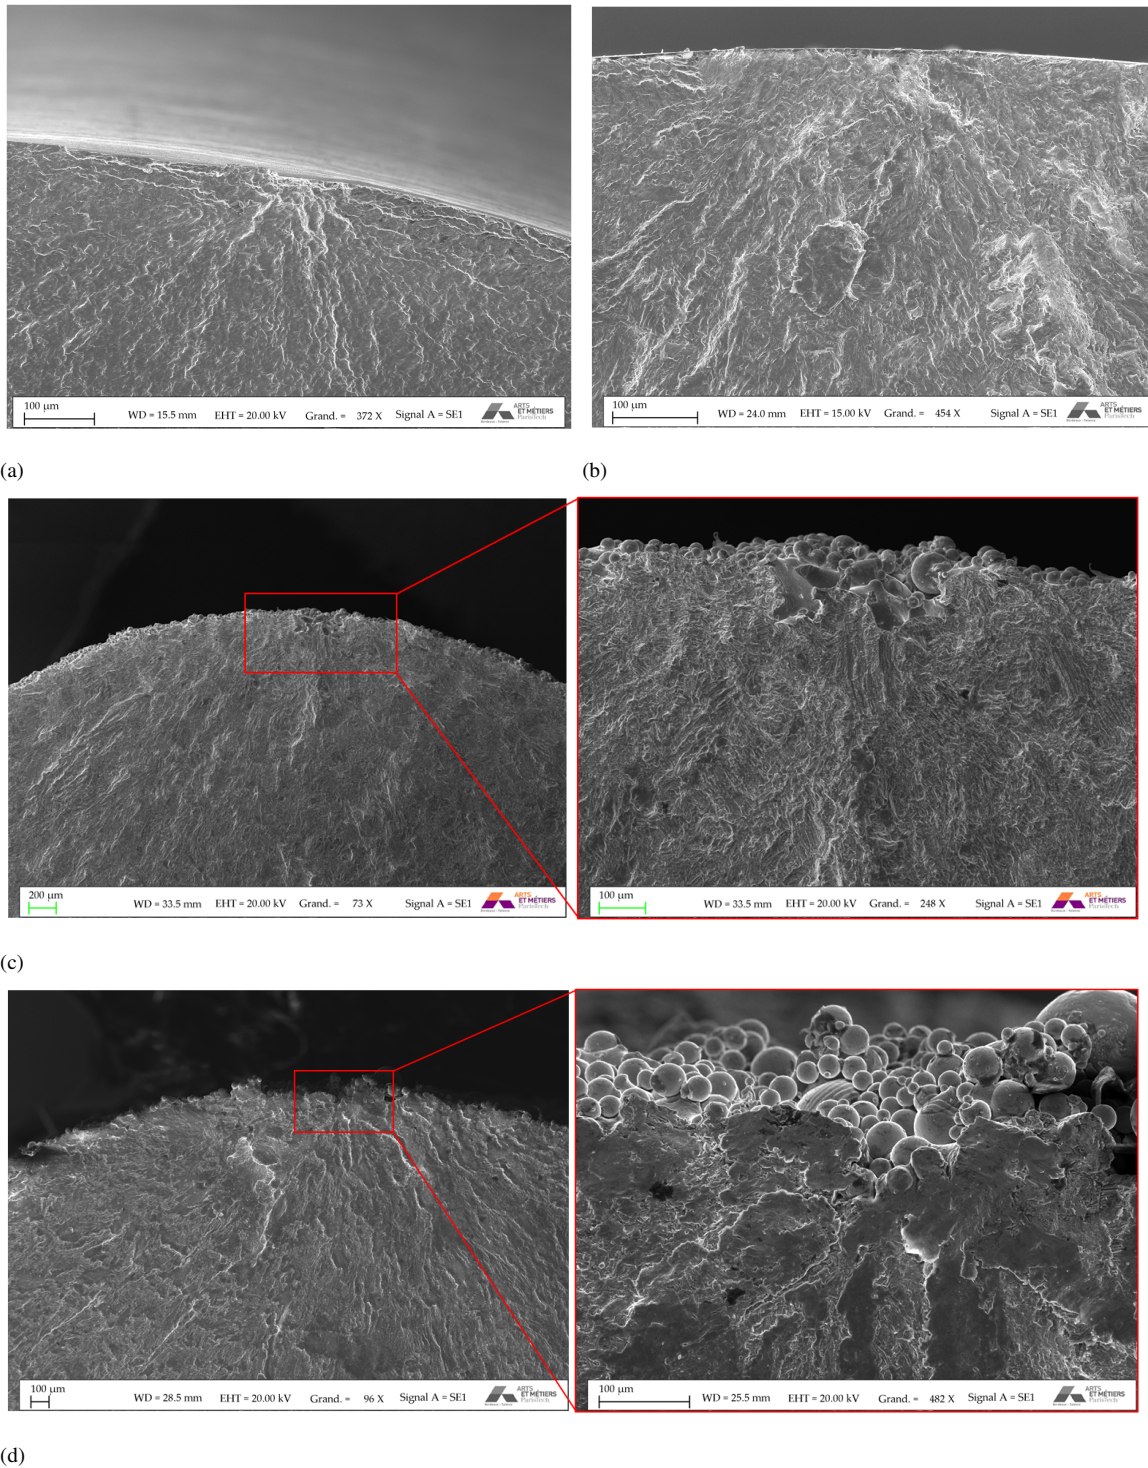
Fracture surface of: an HR machined specimen, 84749 cycles, 680 MPa (a); a SLM machined specimen, 262751 cycles, 550 MPa (b); a SLM as-built specimen, 291965 cycles, 212.5 MPa (c); an SLM as-built specimen, 109201 cycles, 300 MPa (d).
